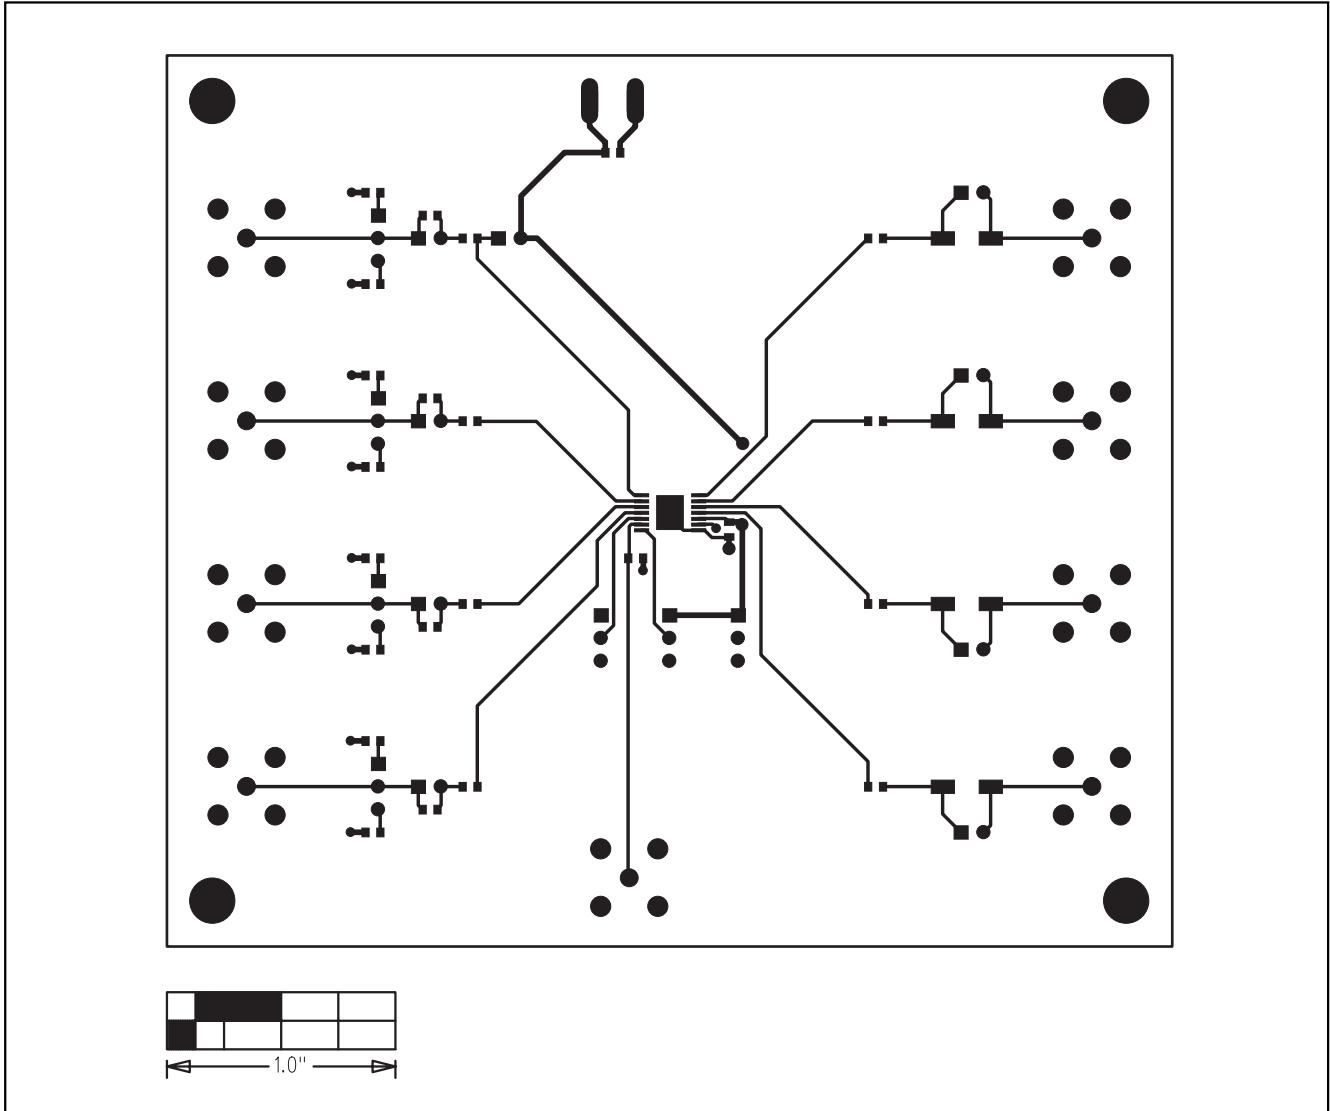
MAX7445 EV Kit PC Board Layout—Component Side
